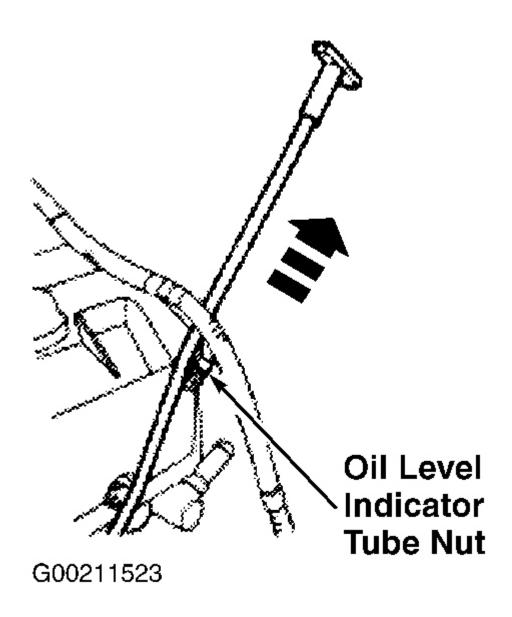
Removing & Installing Oil Level Indicator Tube (Excursion & "F" Series) Courtesy of FORD MOTOR CO.
